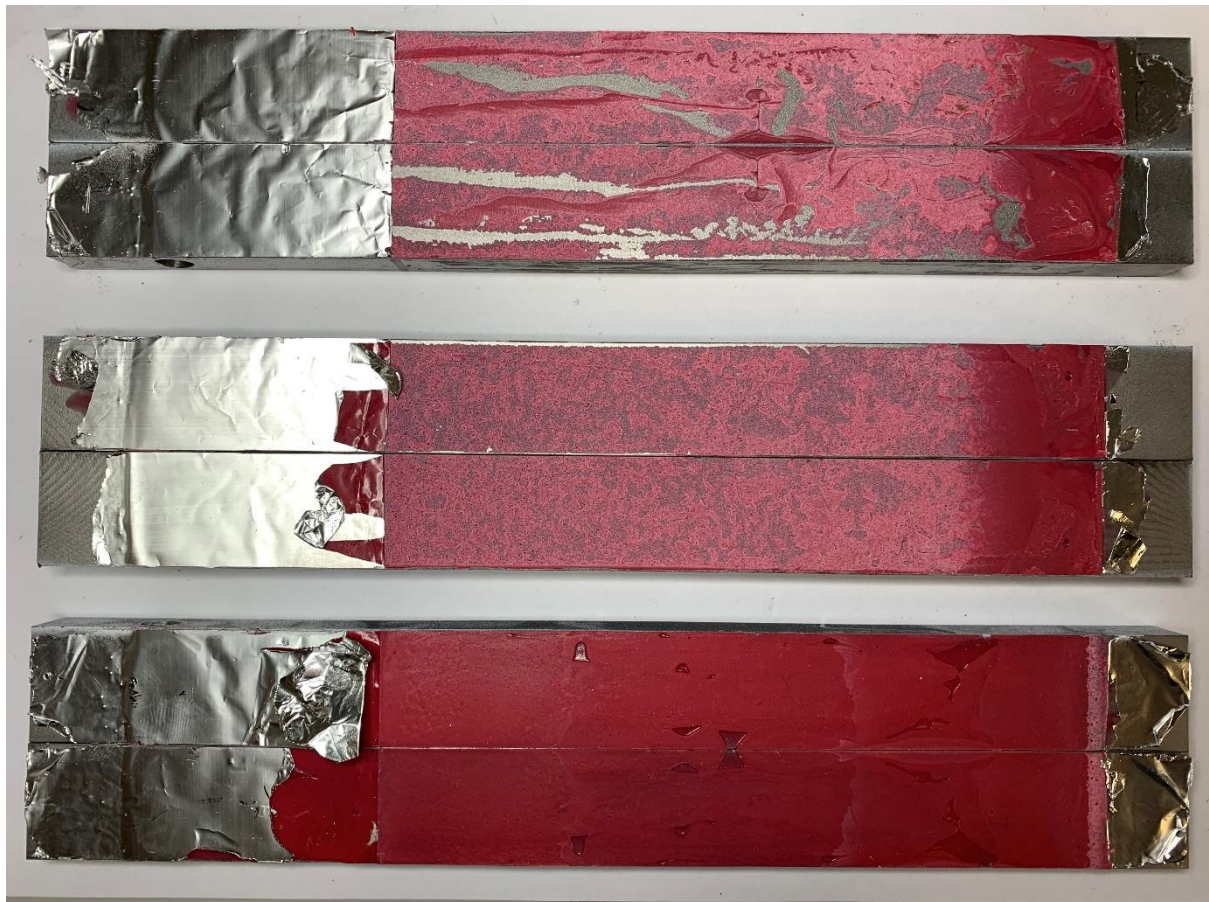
Fracture surfaces T0.8 (A - B - C)
